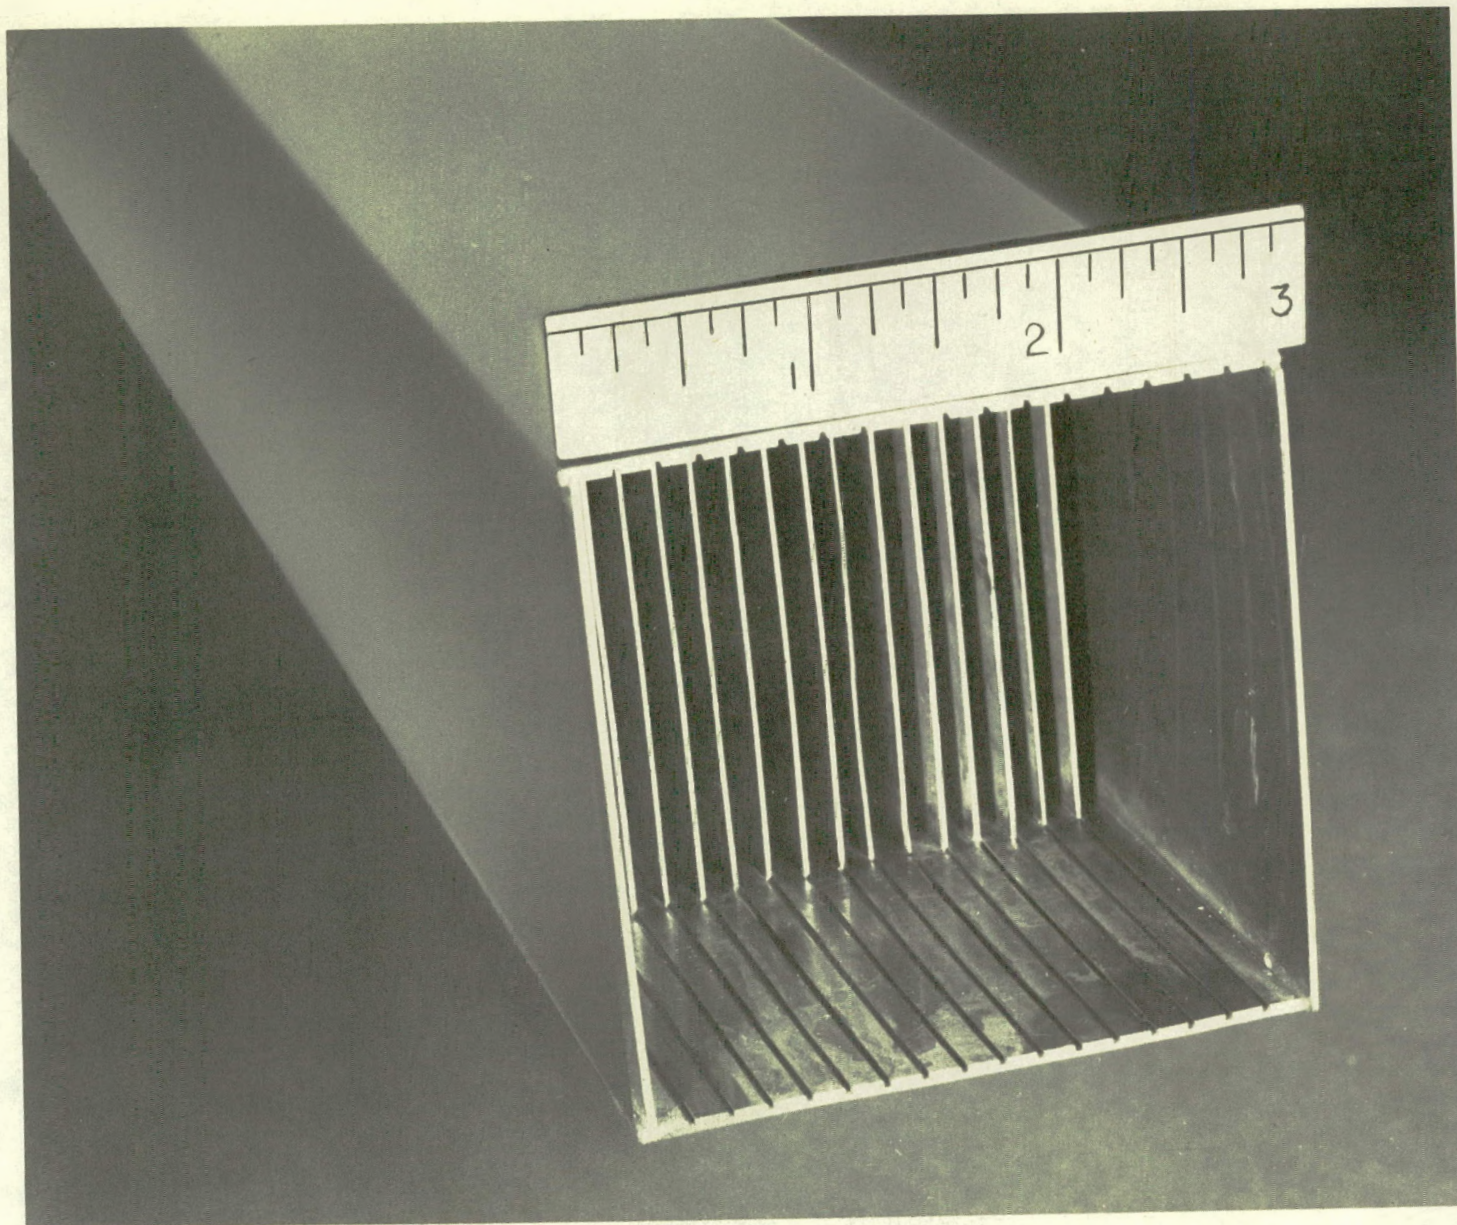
End View of Full Length Brazed Fuel Element Containing Plates Loaded With Depleted UO_2
